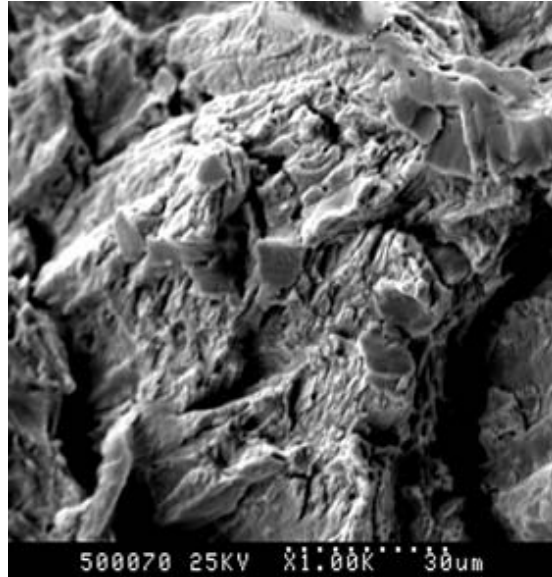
316 tested in 25 MPa H_2 at 20°C showing brittle fracture (1000x)
